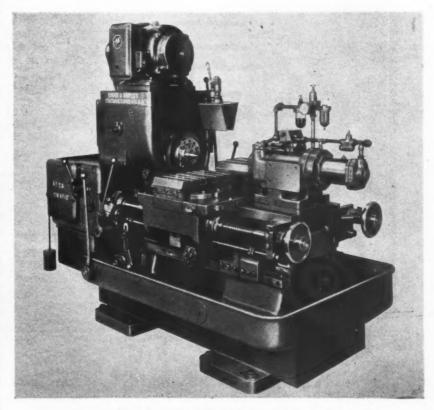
Duomatic Lathe Developed by the Lodge & Shipley Machine Tool Co. for Fast Production of Small Work
